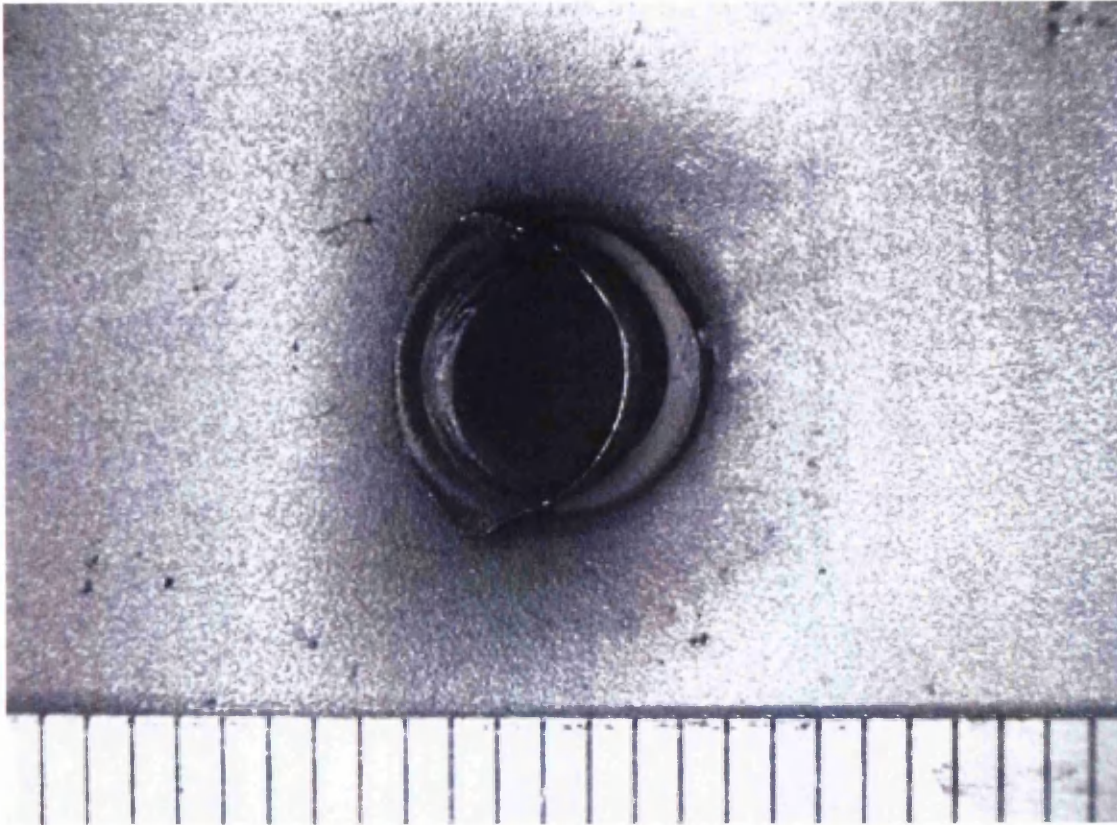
Typical lap shear failure mode exhibited by 5√t welds formed in 1.0mm TRIP600 (Scale is in mm)
